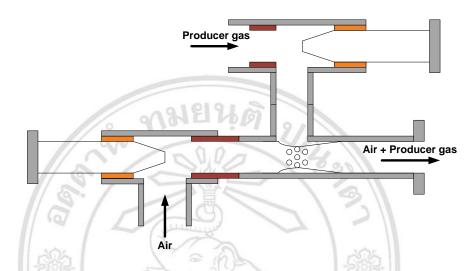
Cut-away view of air-gas mixer for small SI producer gas engine
